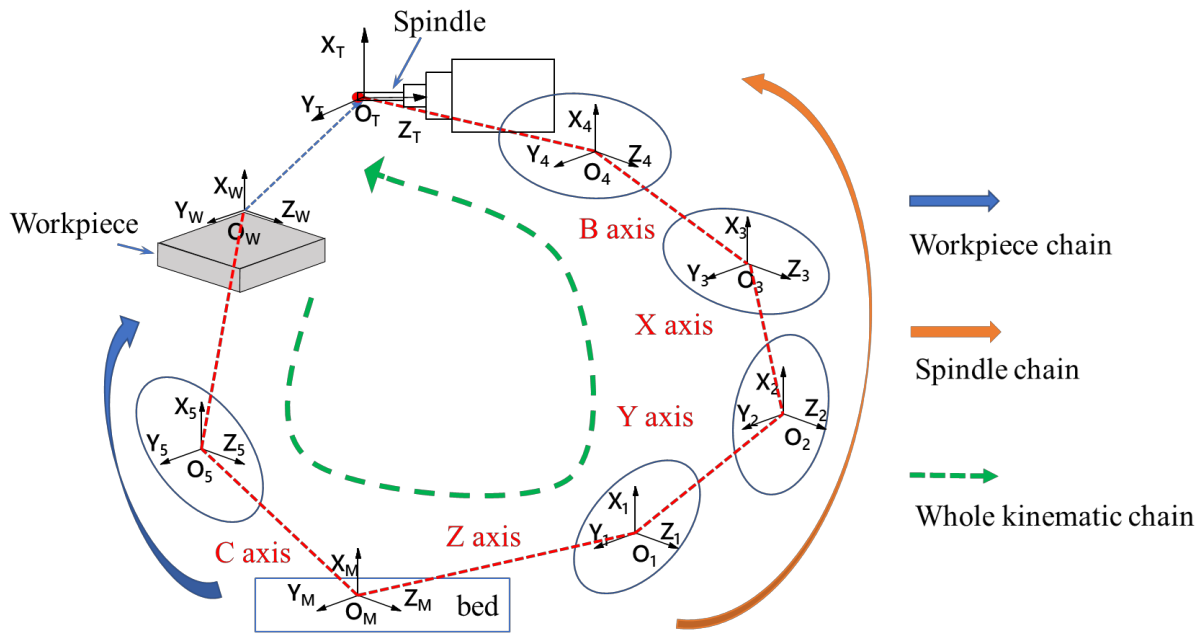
Kinematic chains of a multi-tasking machine tool
